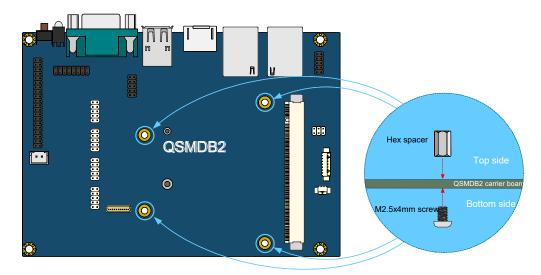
Installing the hex spacers on the QSMDB2 carrier board
